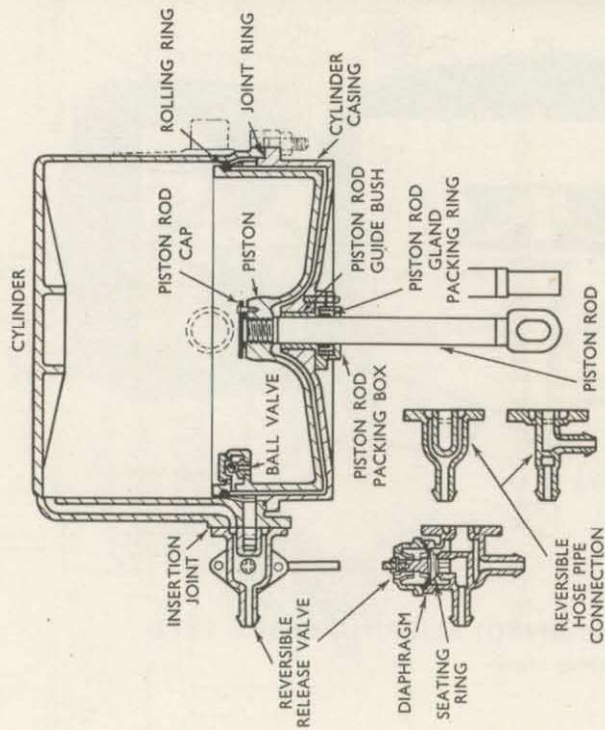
VACUUM BRAKE SEPARATE CYLINDER
